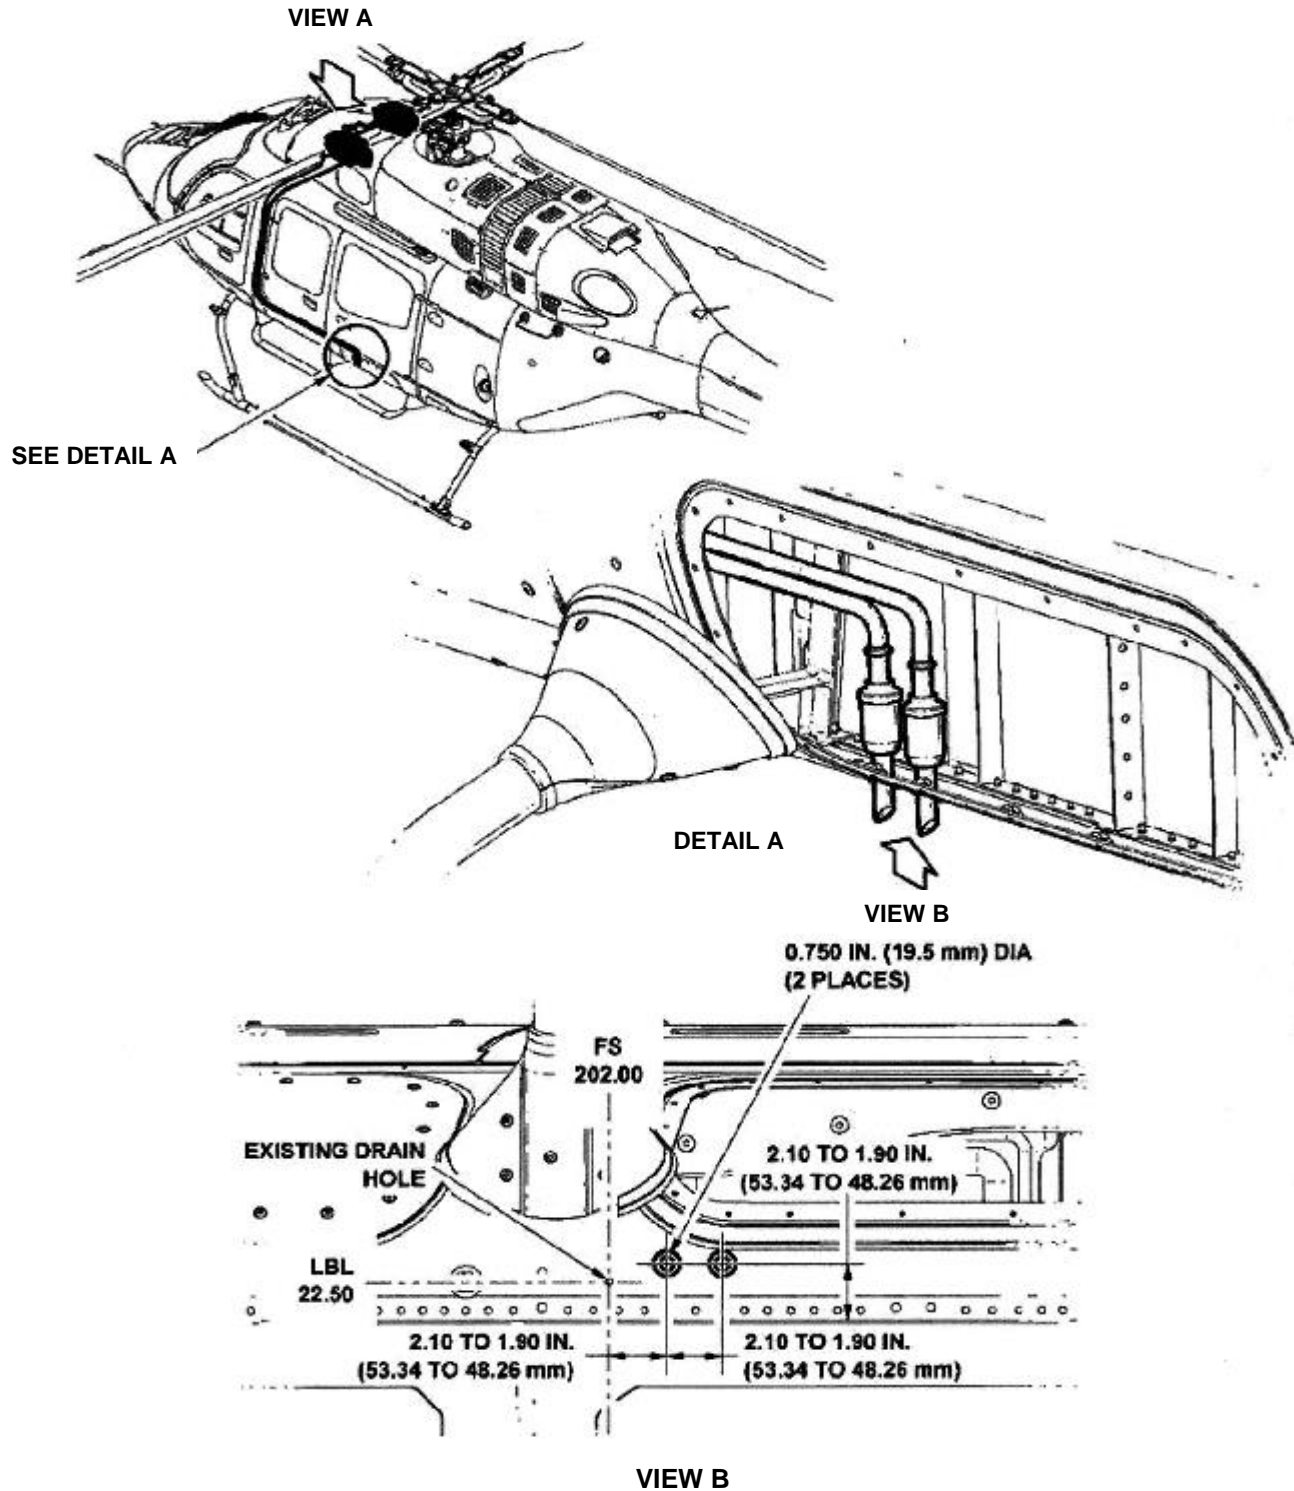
New Drain Holes Location; Left Side Fuselage Assembly
